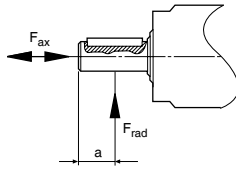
Load on output shaft for basic motor with keyed shaft.
